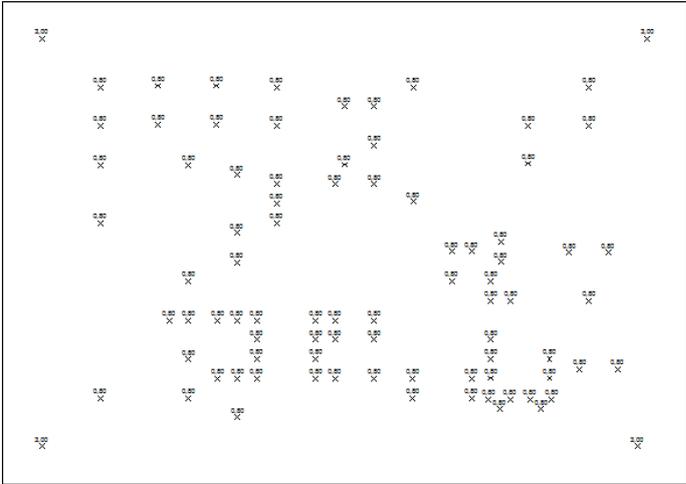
Drill holes diameters of PCB of hybrid SMPS + TL431 + Mosfet power supply
